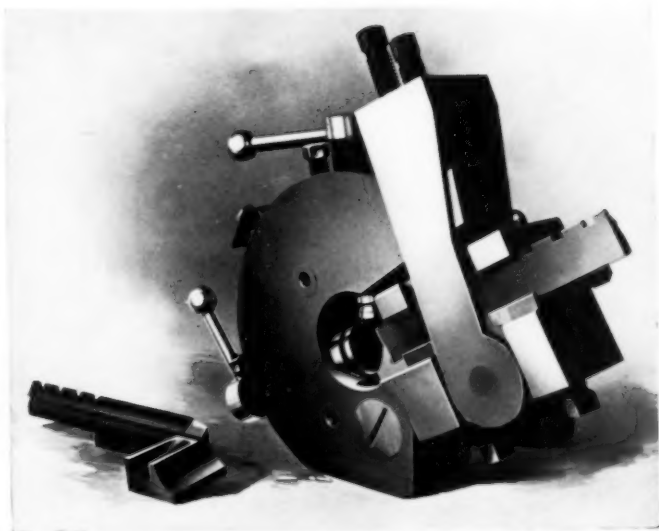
THE NO-CLEARANCE TURNING TOOL FOR THE FLAT TURRET LATHE
